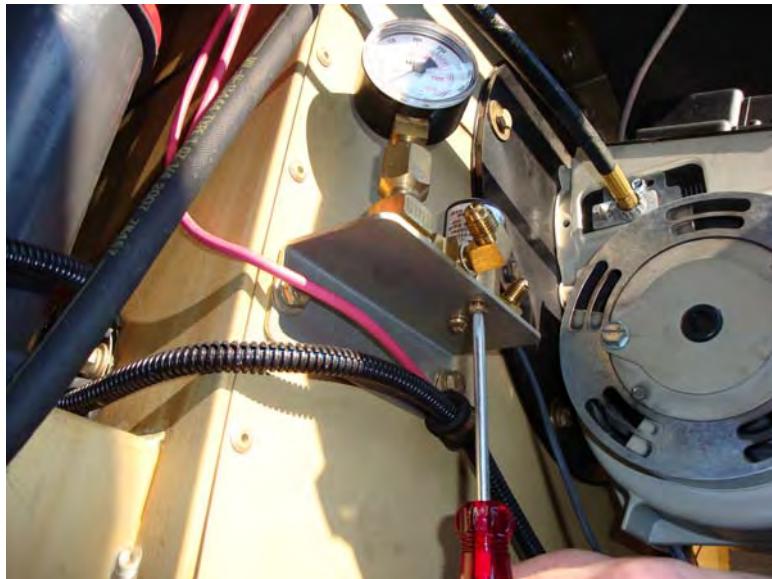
Remove Screws at Base of 2-Way Solenoid Valve.
